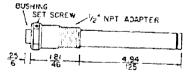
Part No. WEL14A-600R buib well for fiquid immersion applications where the temperature buib may be removed without draining the tenk.
